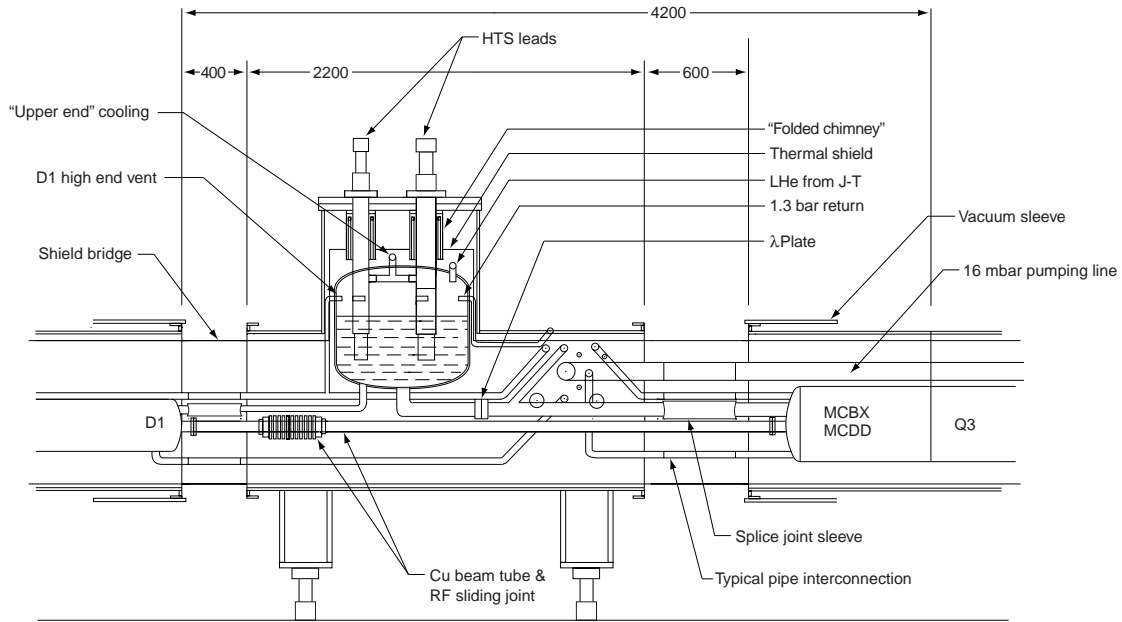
Elevation view of IR8 left feed box installation.
